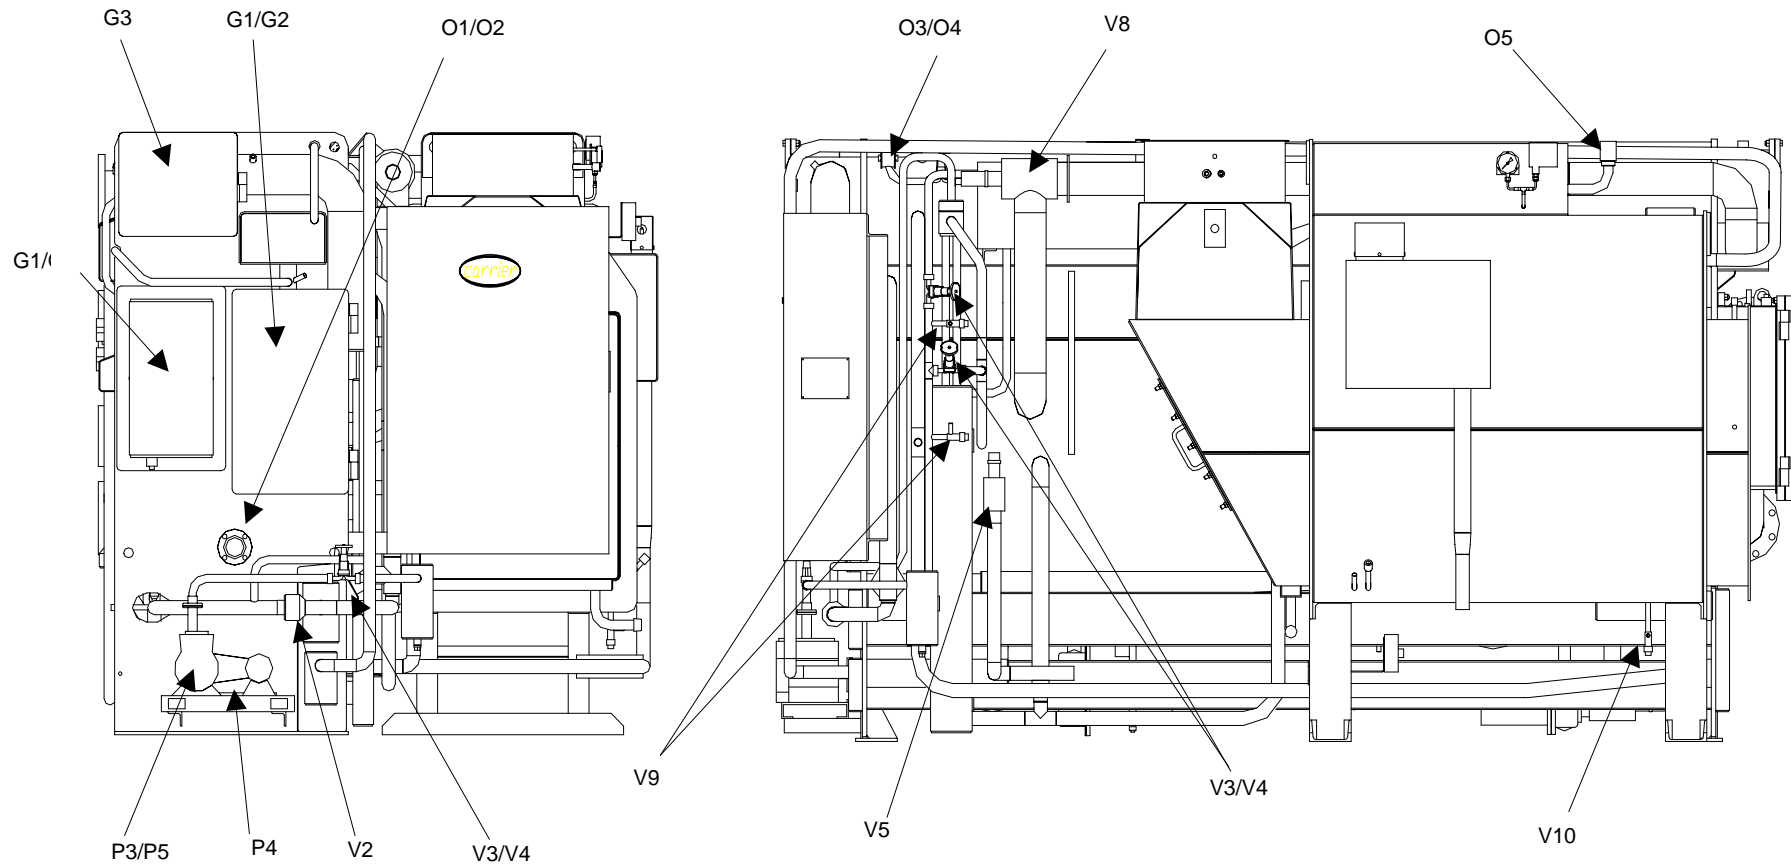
Valve and Components Location, Front and Side Views (16DNP018 Liquid tube type chiller)
